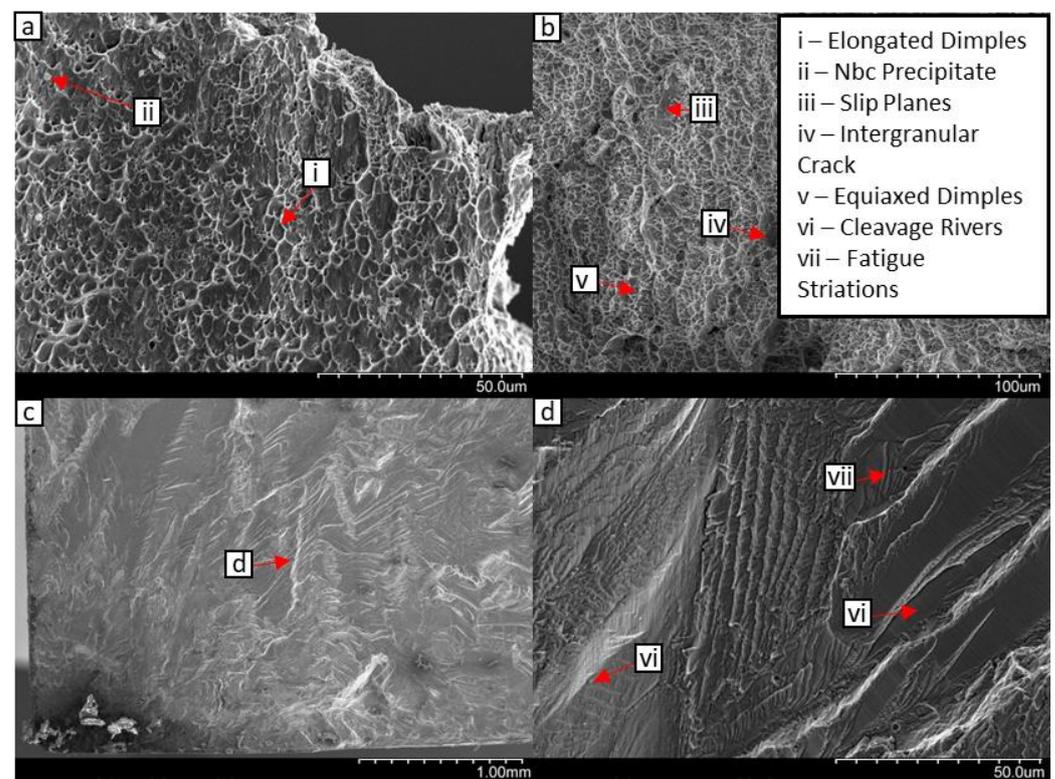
Fractography of tensile samples (a,b) and fatigue samples (c,d) showing representative fracture modes.
